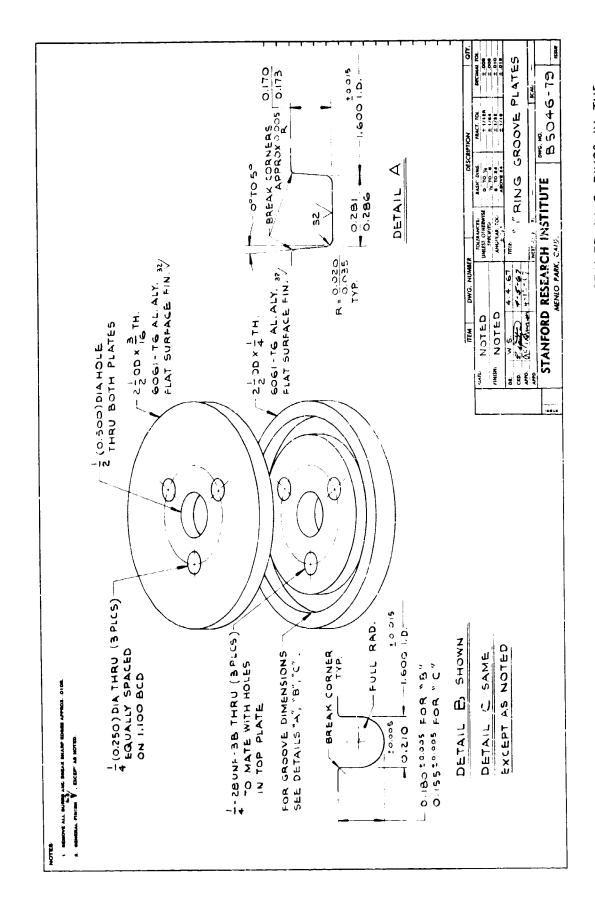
FLANGE TEST FIXTURES FOR DETERMINING VCM RELEASED BY SEALED-IN O-RINGS IN THE THEFMAL-VACUUM ENVIRONMENT
